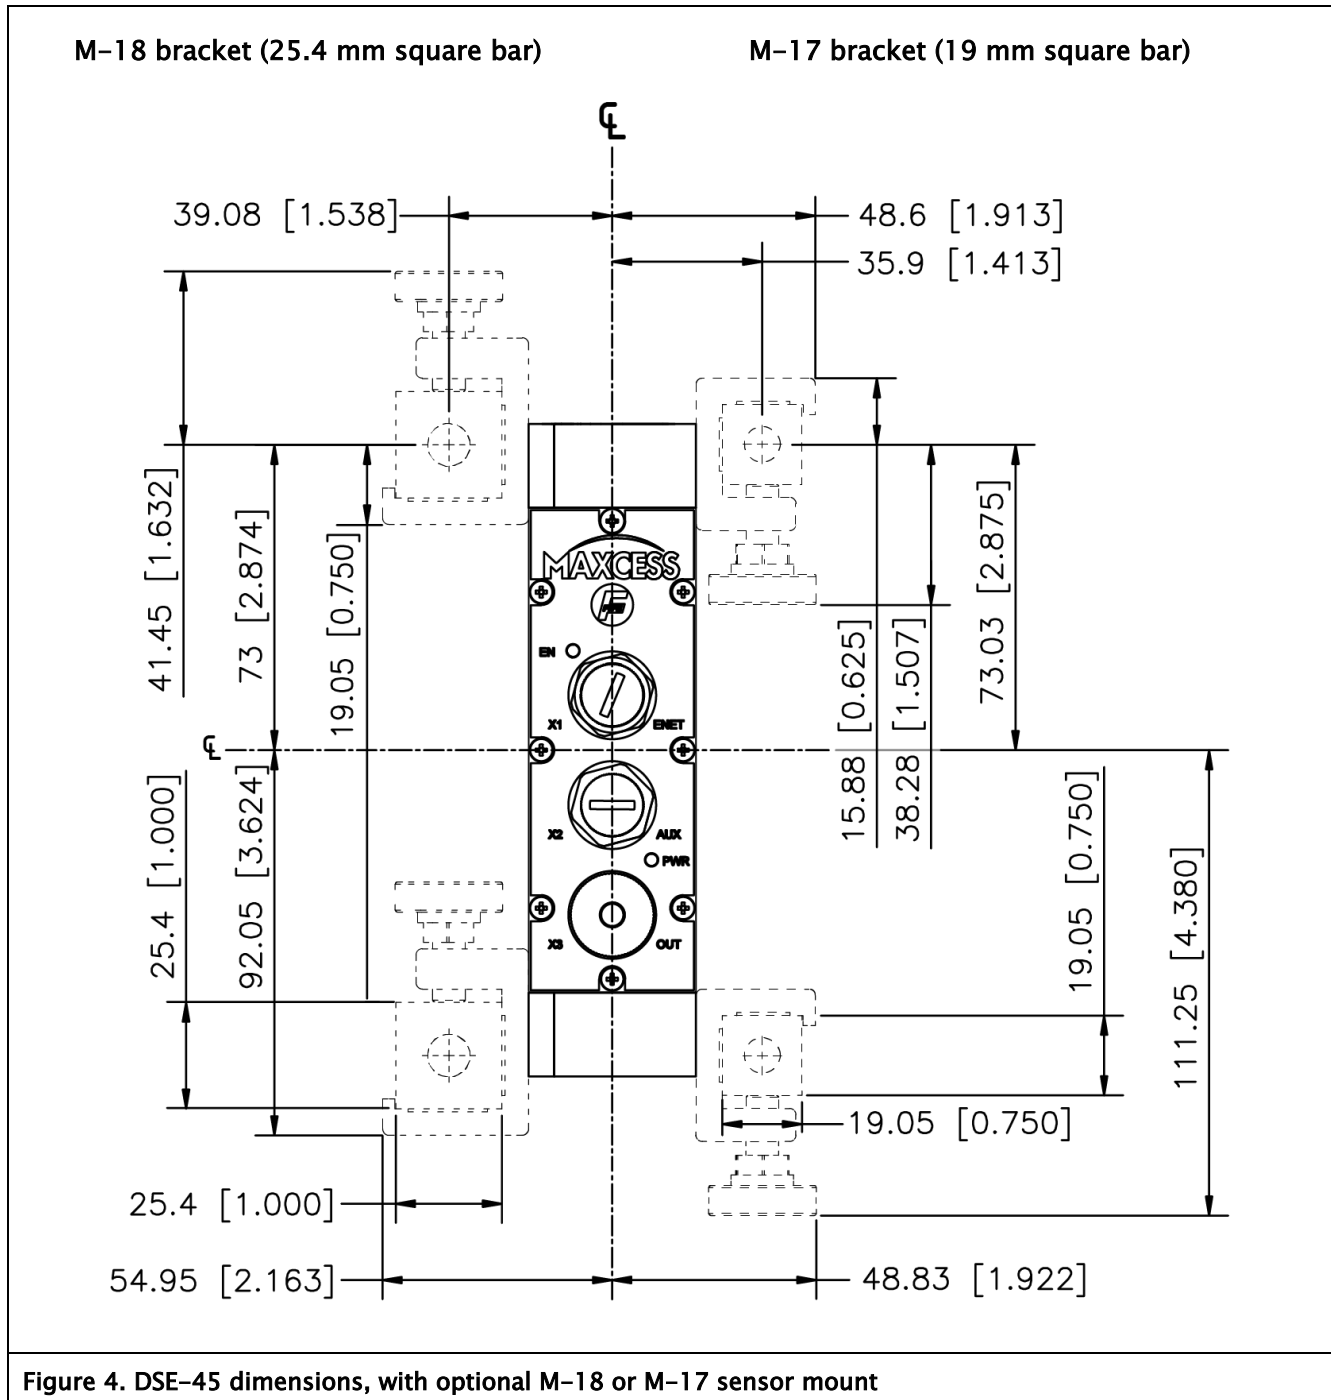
DSE-45 dimensions, with optional M-18 or M-17 sensor mount
